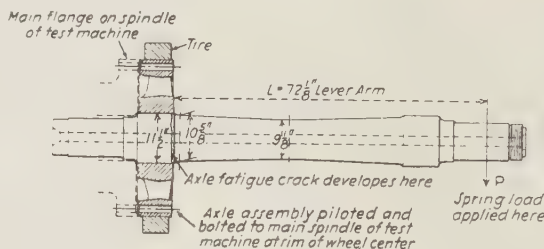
Details of axle-and-wheel assembly tested in the fatigue machine.
